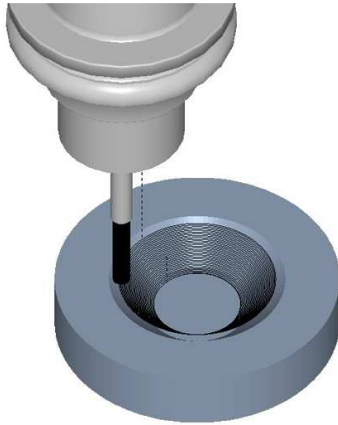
Generated tool paths performed in EdgeCAM software for 3D milling
